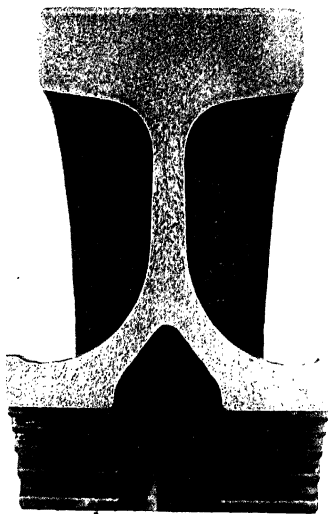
Macrostructure of Mercedes-Benz D.B. 601N airscrew reduction gear.
